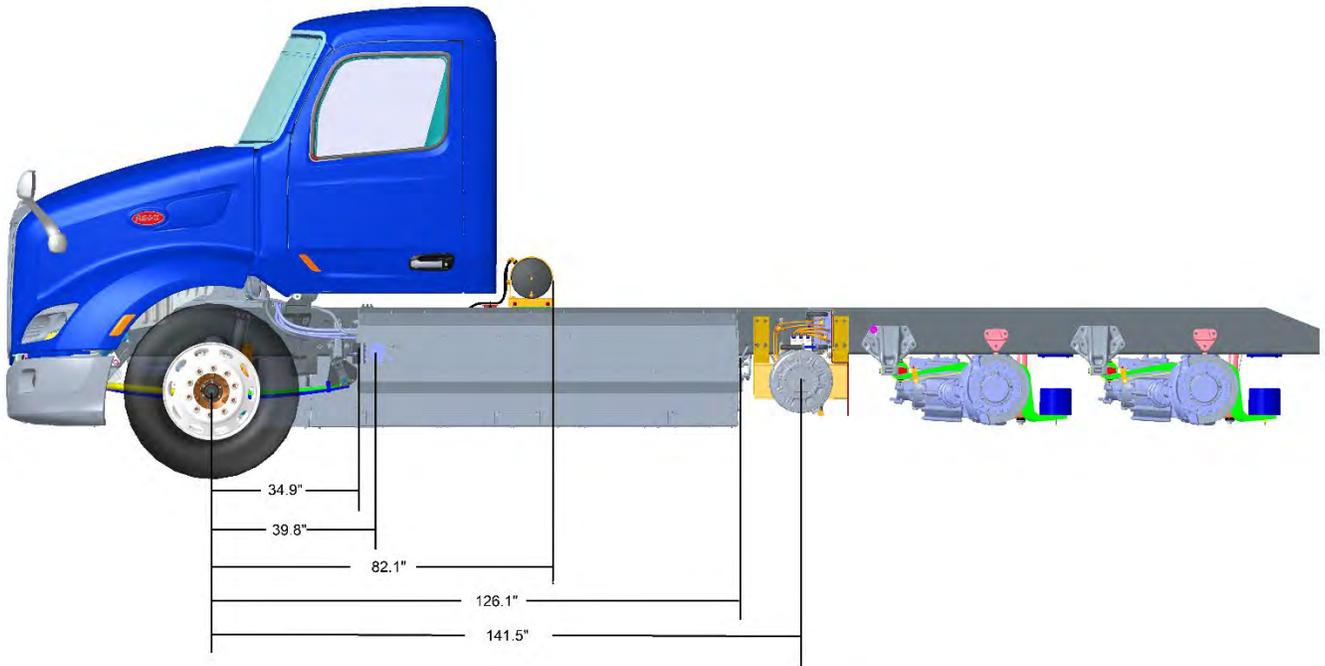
579 BEV Dimensions 216" (shown with optional ePTO)
